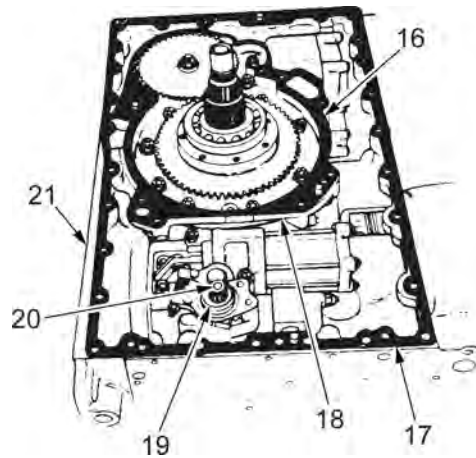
Input Housing Gasket, Bevel Gear Gasket, and Steer Shaft Seal Removal.
